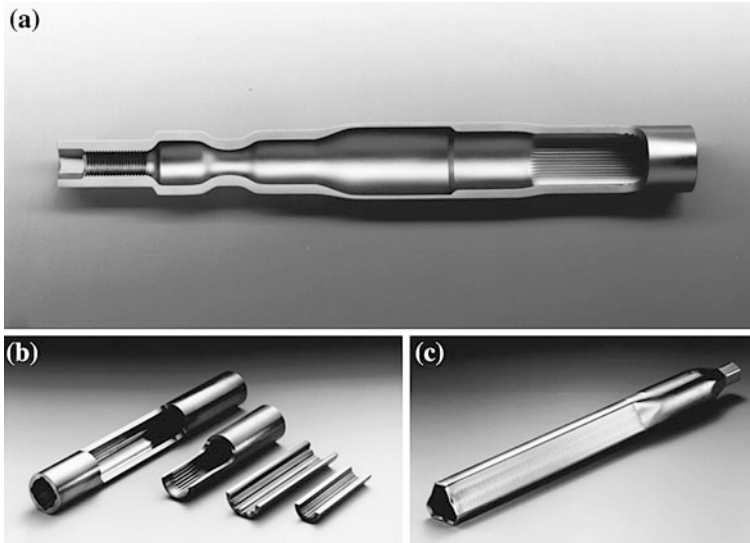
Examples of swaged hollow shafts—a shaft (all geometries besides the internal tothing are swaged), b hollow profiles with serration and involute tothing as well as ball tracks (swaged with a profiled mandrel), c steering shaft with 3 and 4-edge on the workpiece ends (Source Gebr. Felss GmbH)
